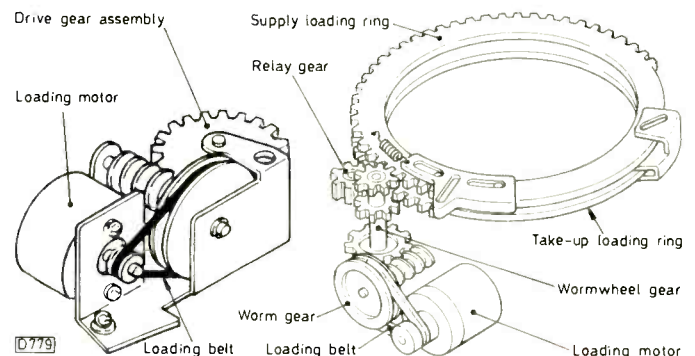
The loading block and loading rings. The simplest way to replace the belt is to remove the block, but note that the rings are then free to move and can thus become unmeshed.
